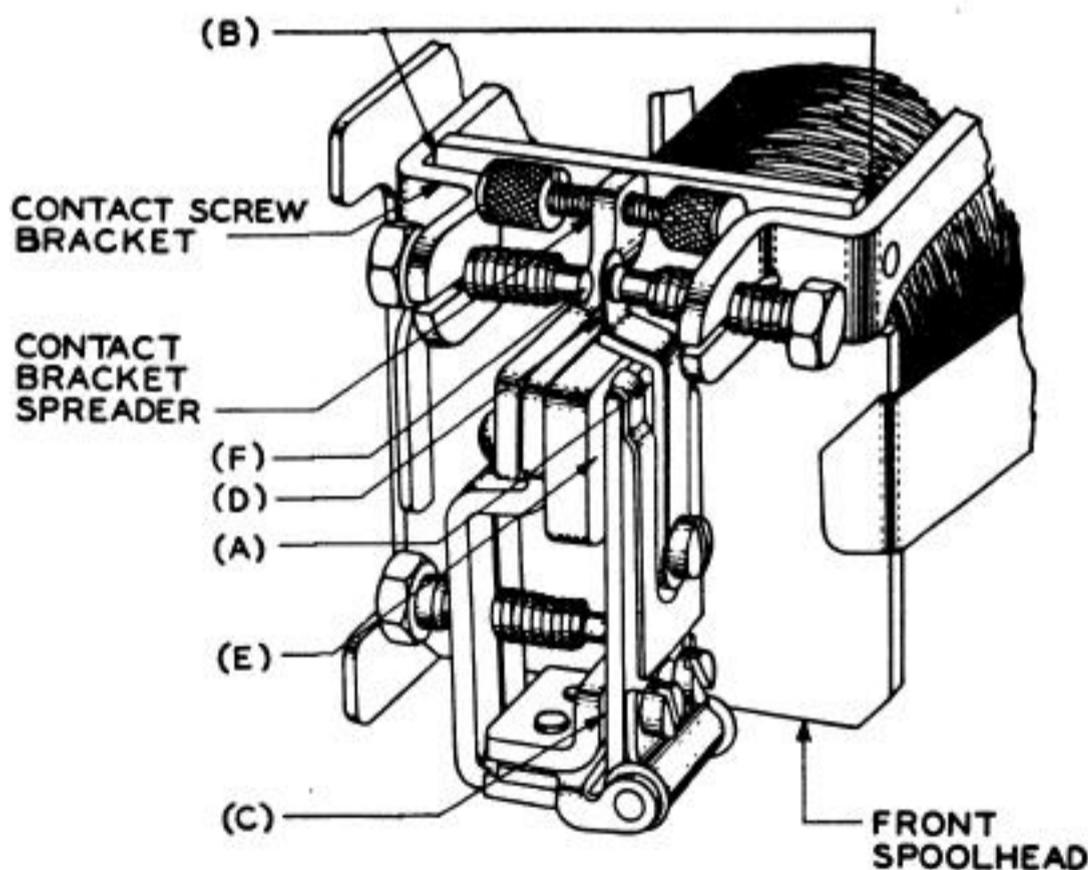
Relay Equipped With Contact Bracket Spreader
